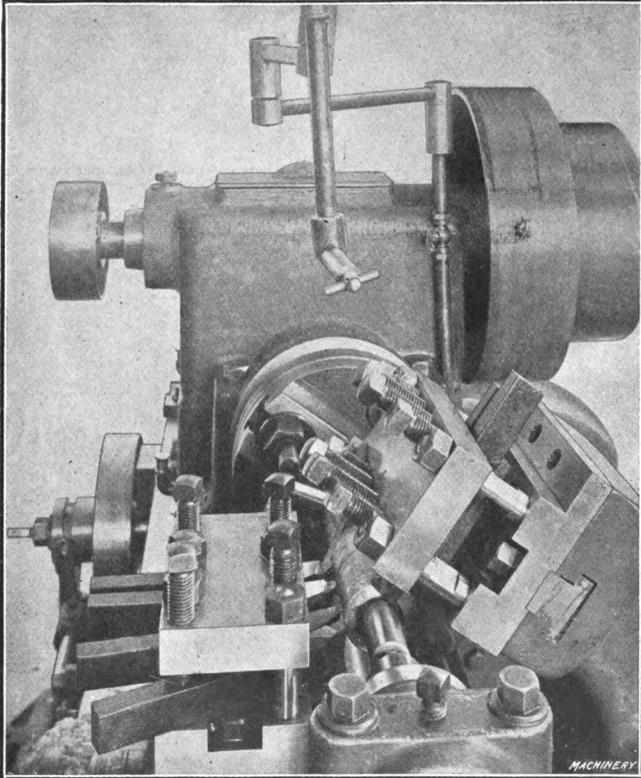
Turning Work carried on a Square Arbor in a Fay Automatic Lathe
